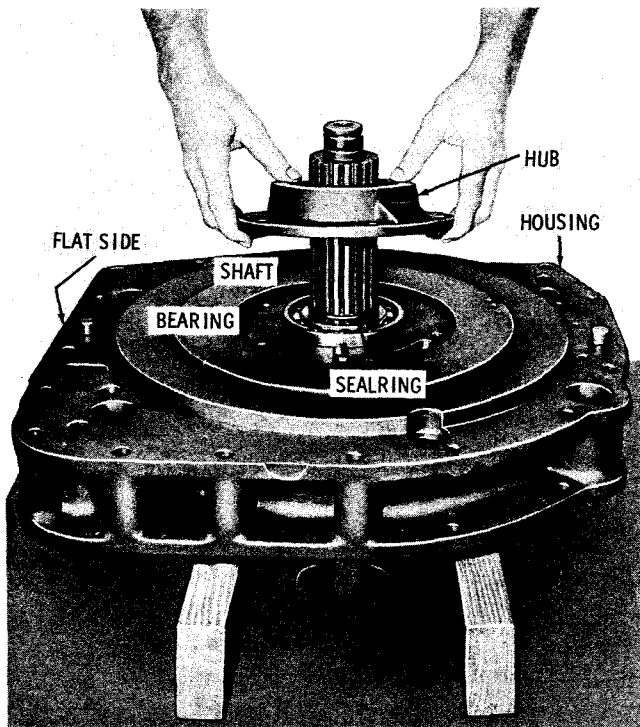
Installing oil transfer hub onto retarder housing
